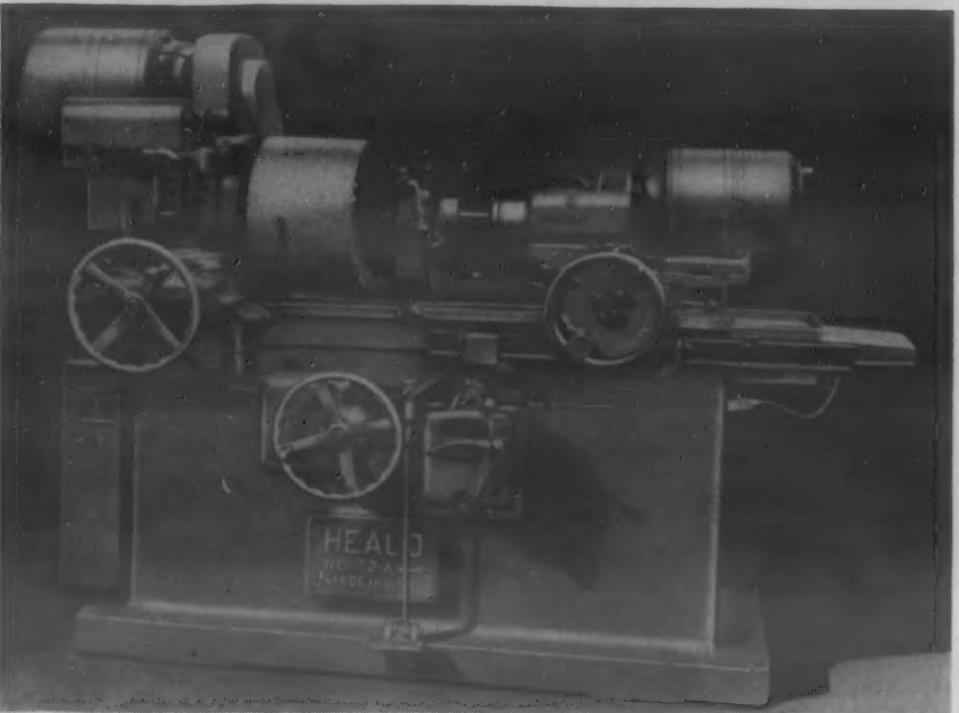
Front view of an internal grinder. (Courtesy: Heald Machine Co.)
